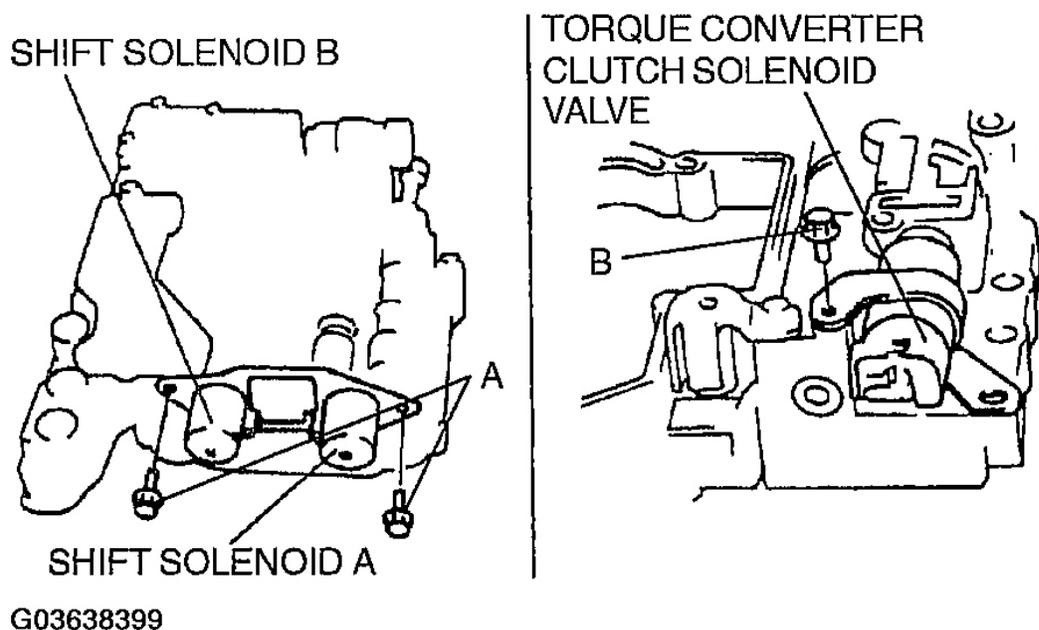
Identifying Torque Converter Clutch Solenoid Valve
